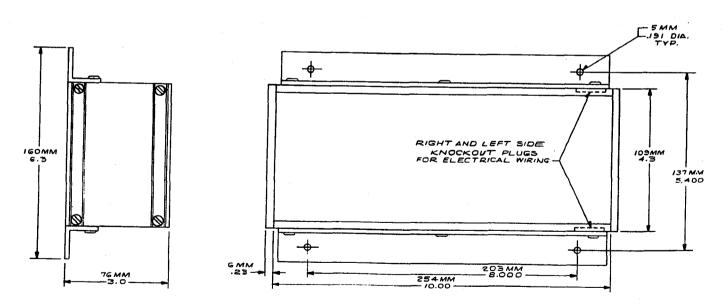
2. Mounting Dimensions, Surface Mounting Models
